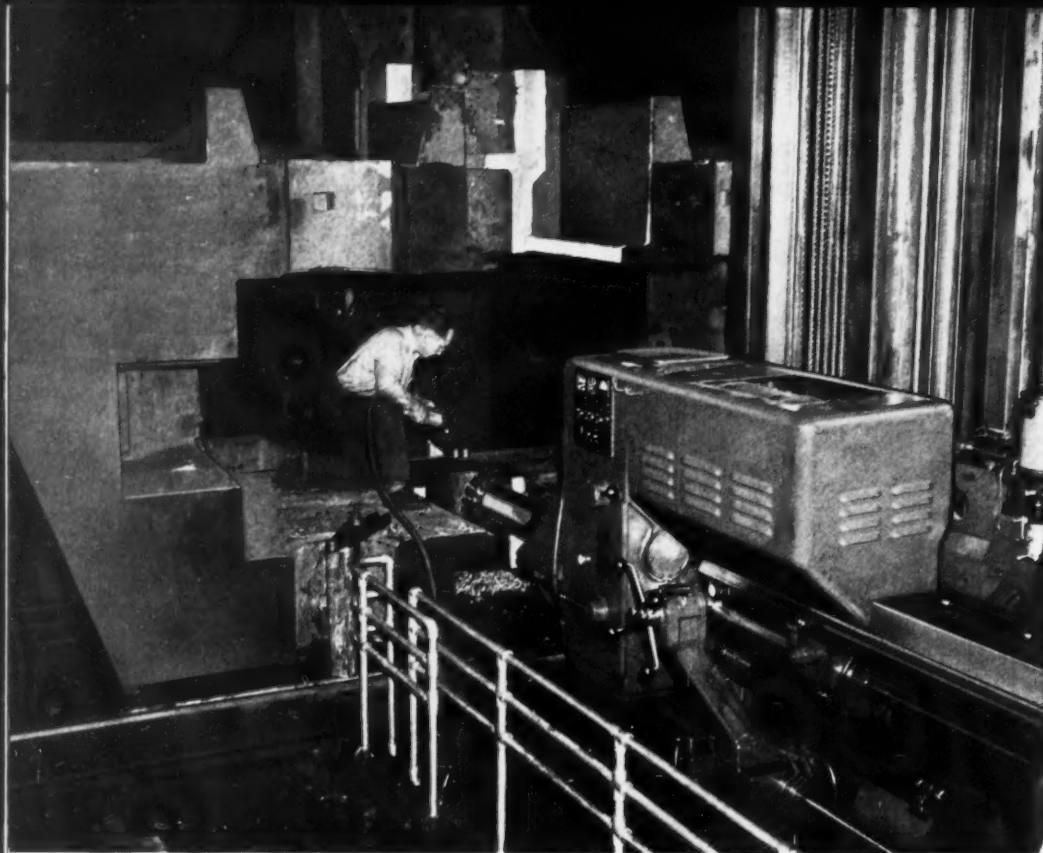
Milling Right-angle Joint on a Gear-housing Base. This Gear Housing is Built up Entirely of Fabricated Steel Sections
